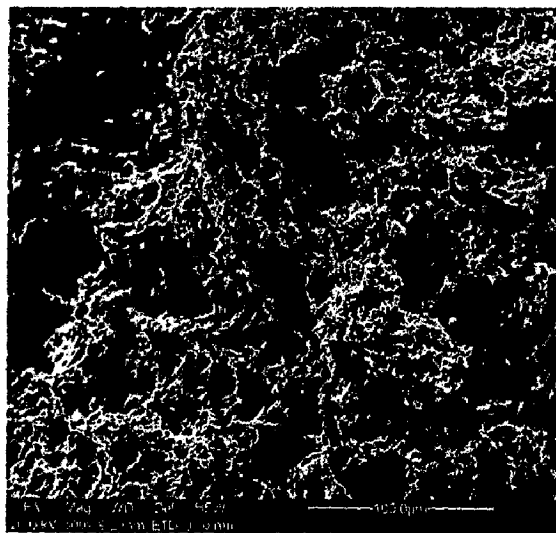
Fractured surface of tensile specimen of weldment with flux 1 Heat Treated
